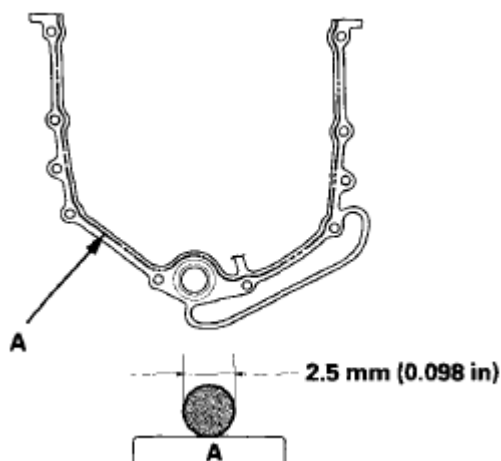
Identifying Diameter Bead Of Liquid Gasket
